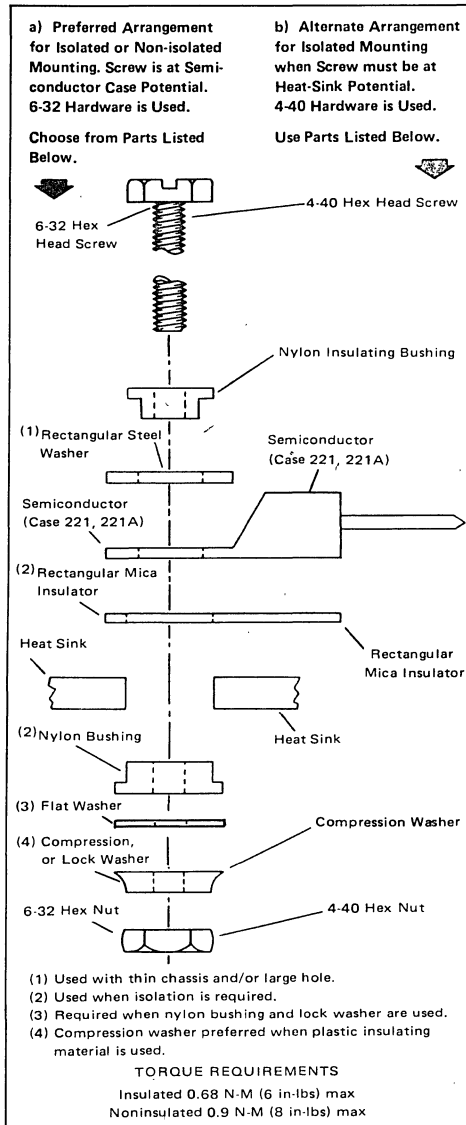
Mounting Arrangements for Thermowatt Packages
